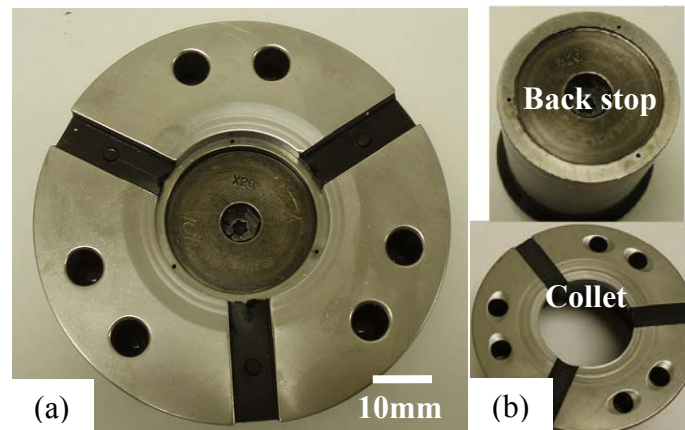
Counter spindle workpiece holding (a) assembly and (b) back stop unit and collet for Operations 6 to 9
